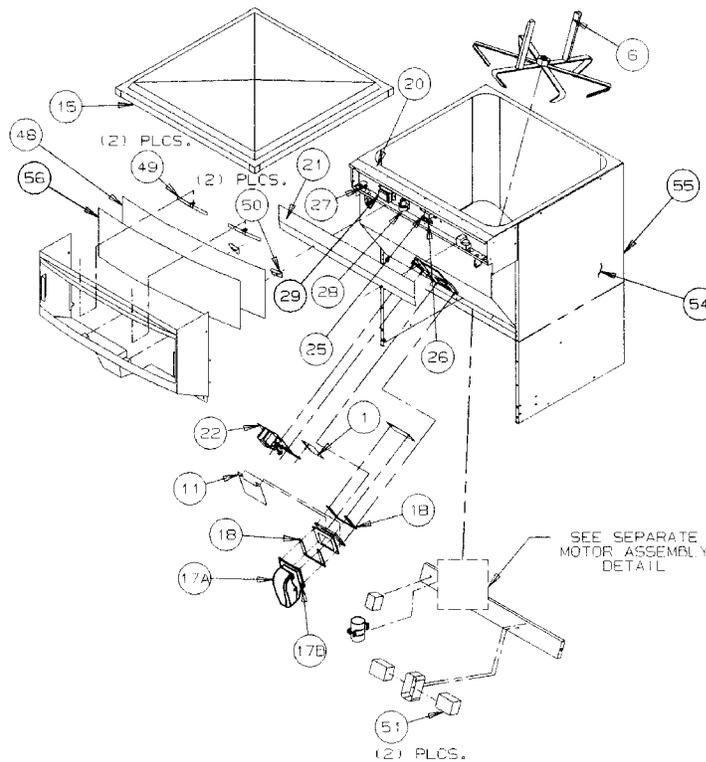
EXPLODED VIEW - UPPER SECTION AND PARTS LIST
